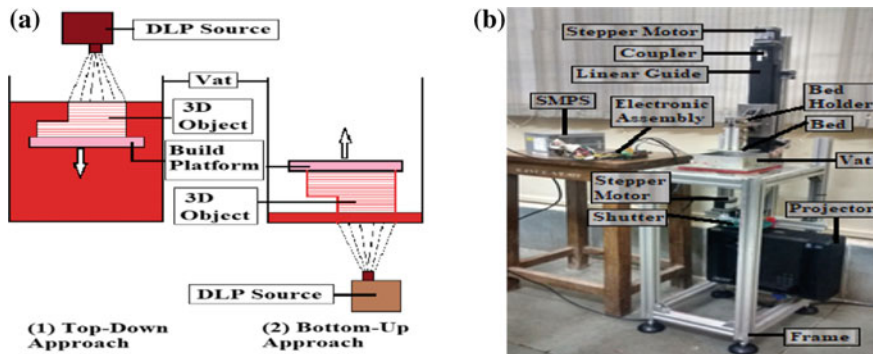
a DLP 3D printing approaches; b Indigenously fabricated DLP 3D printing machine at KJ Somaiya College of Engineering, Vidyavihar, Mumbai, India
